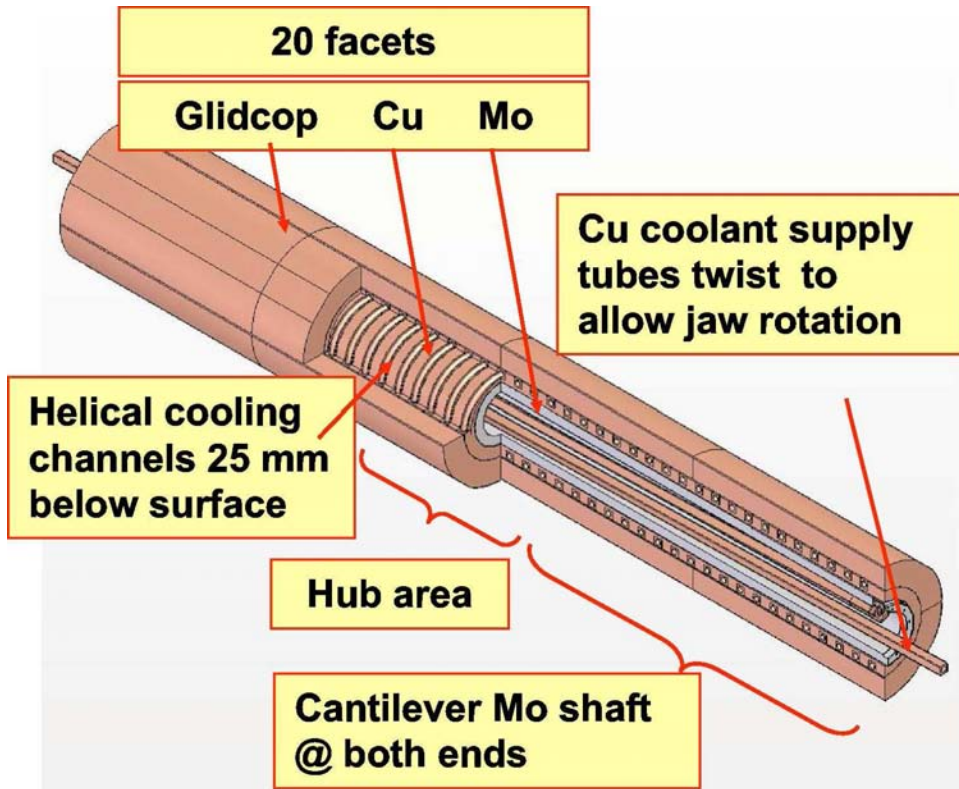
Cutaway of Jaw showing outer jaw surfaces and cooling tube routed through the center of the molybdenum shaft.
